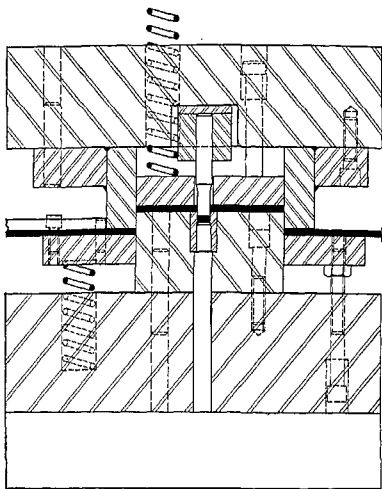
Single-station heavy blanking die. (Leake Stamping Co.)
